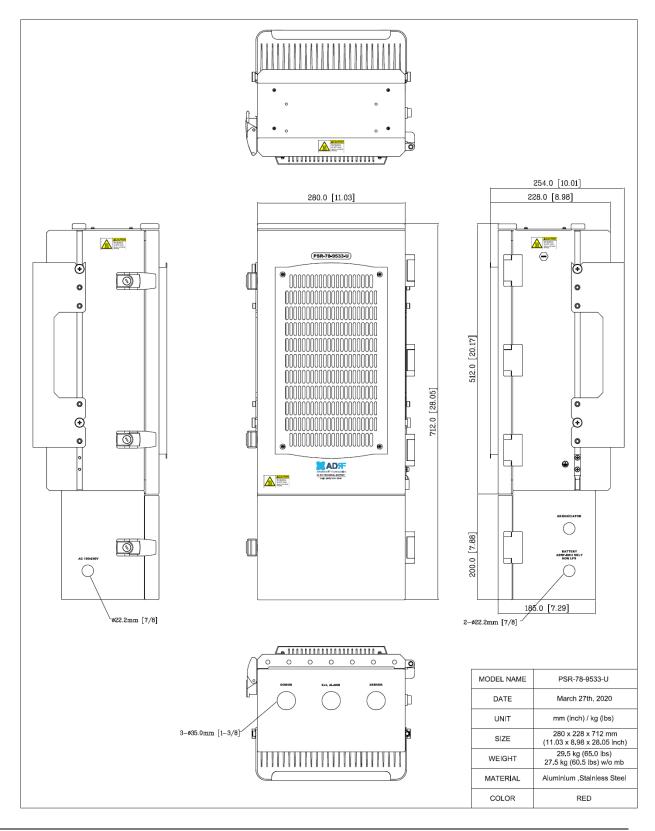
PSR-78-9533-U Mechanical Drawing
